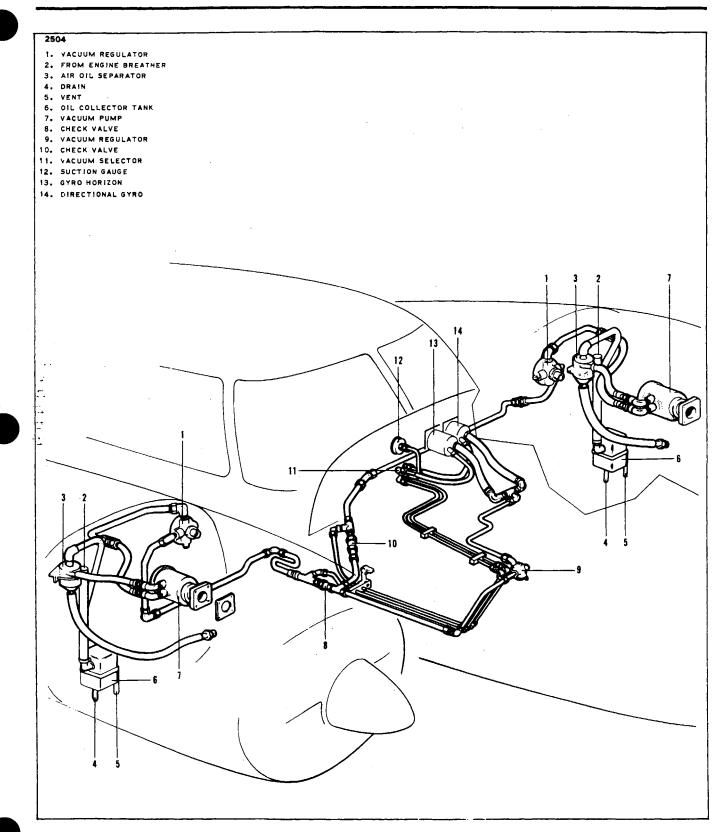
Vacuum System, PA-23-250, Serial Nos. 27-1 to 27-443 incl.
